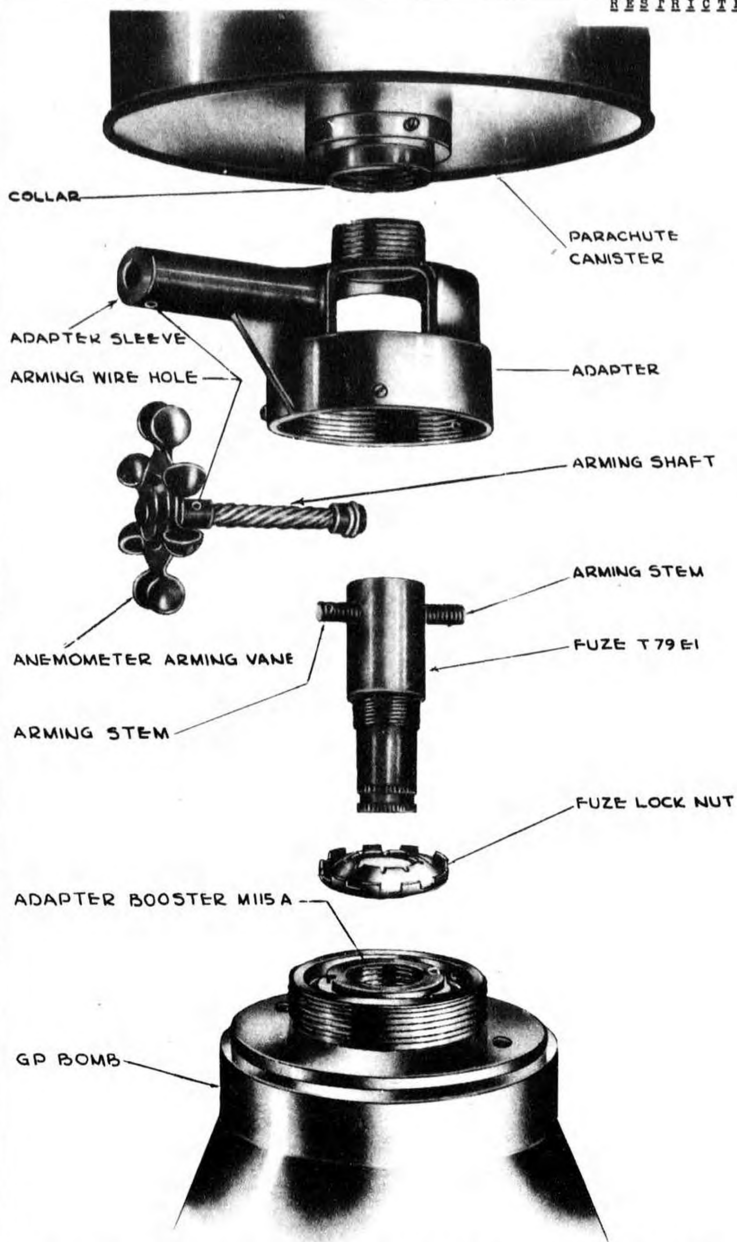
EXPLODED VIEW SHOWING COMPONENTS OF ANTI-RICOCHET BOMB PARACHUTE ASSEMBLY
